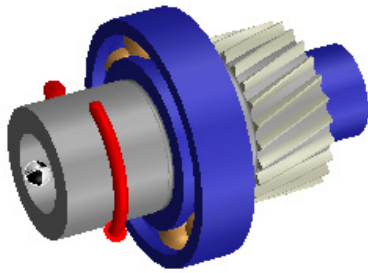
Drive gear, shaft, and bearings in the simulation model.
